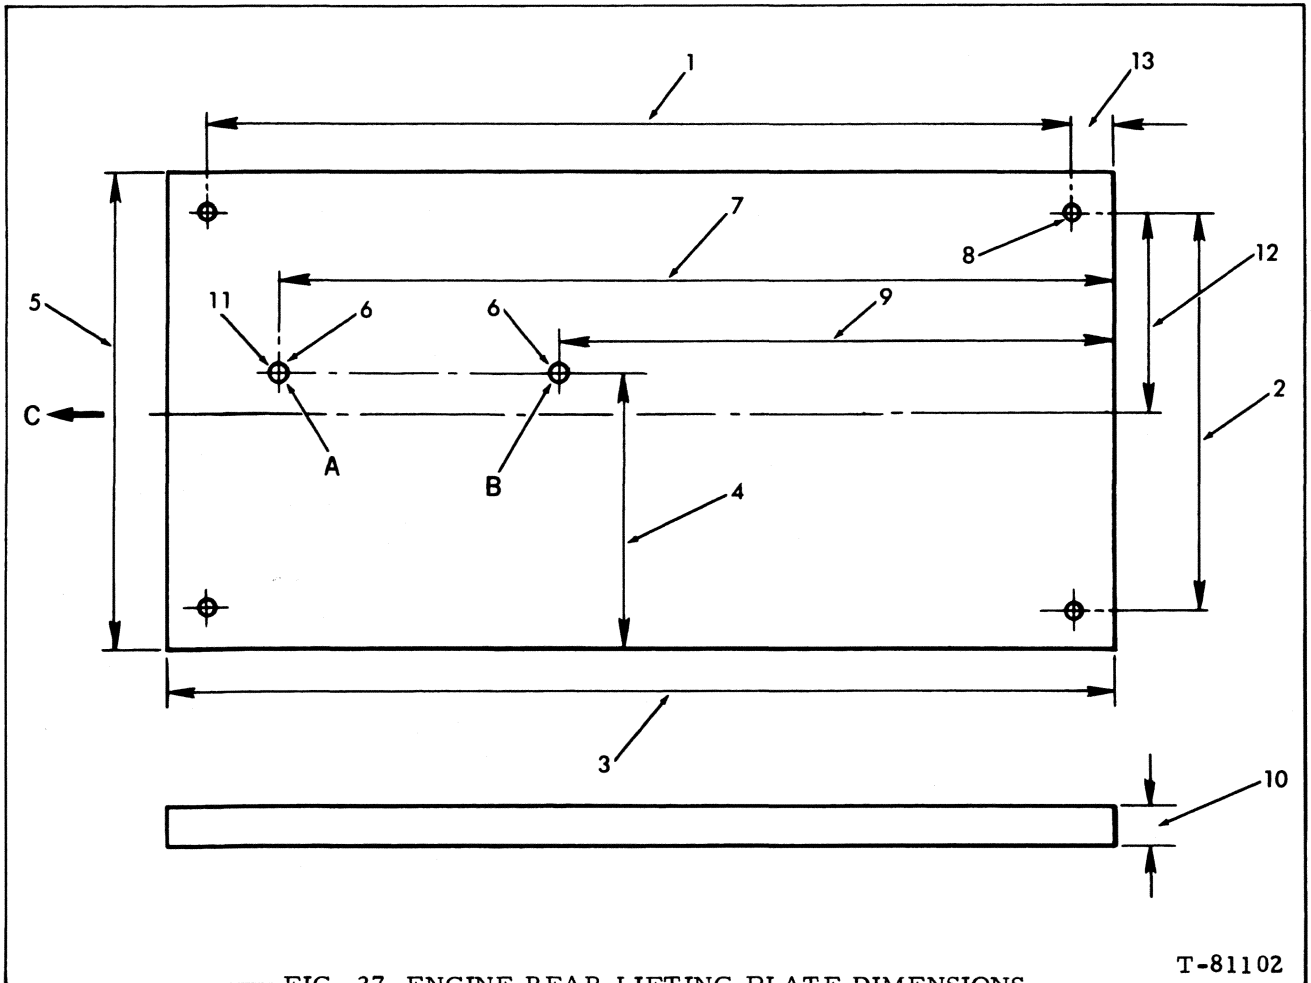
ENGINE REAR LIFTING PLATE DIMENSIONS
